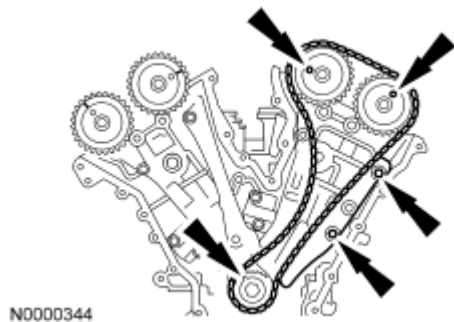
Aligning Marks On Timing Chain With Marks On Camshaft & Crankshaft Sprockets
